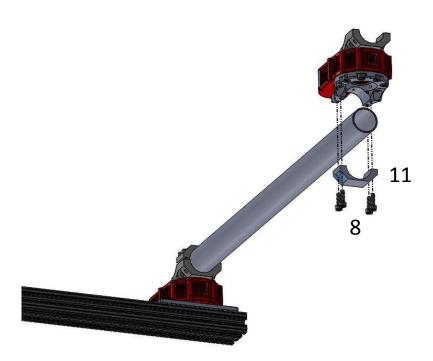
Attaching the Assembly in Fig. 6 to the Assembly in Fig. 4
